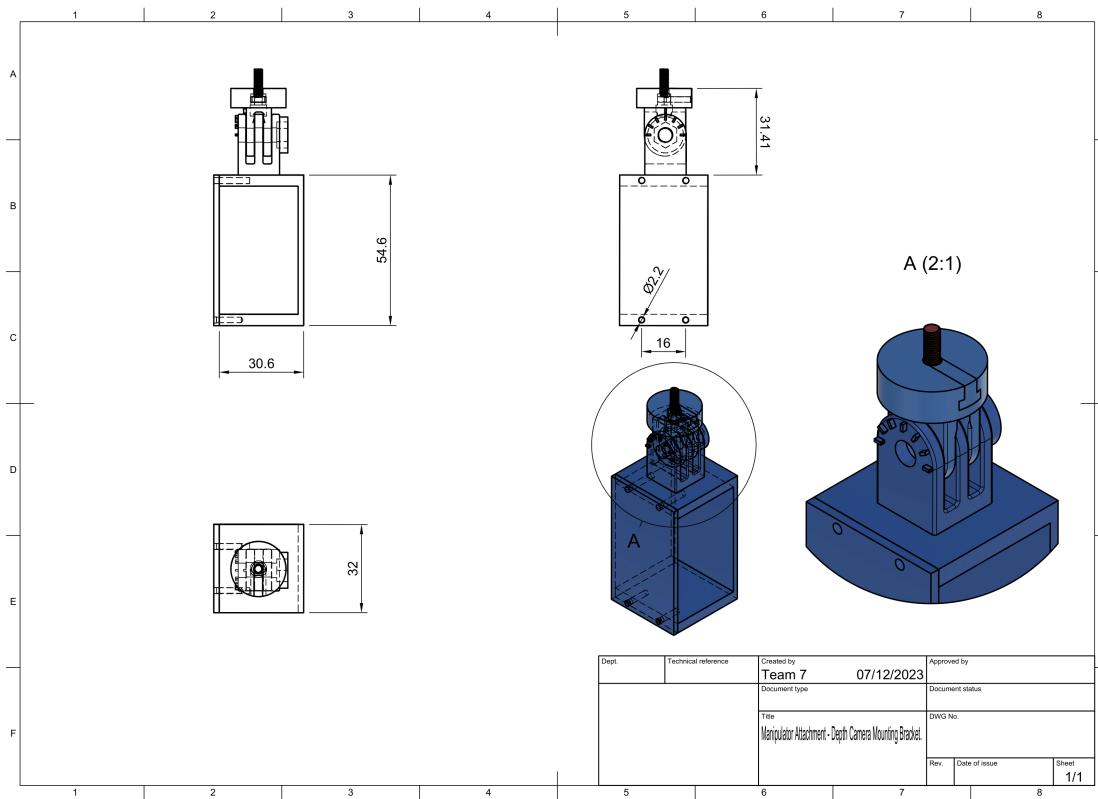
Mechanical drawings of the depth camera mount for the Manipulator
